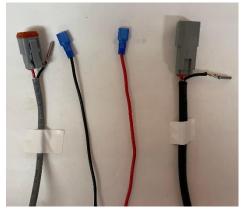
Two outer cables should be held tight by nickel crimps that are left out for demonstration purposes before pushing into the receptacle and the plug.
